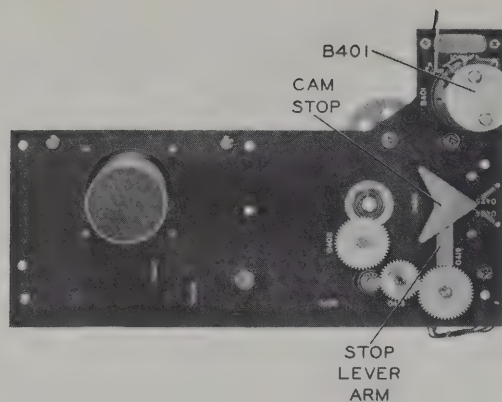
Variable Inductor Subassembly, Top View with Drums Removed, Alignment Points
